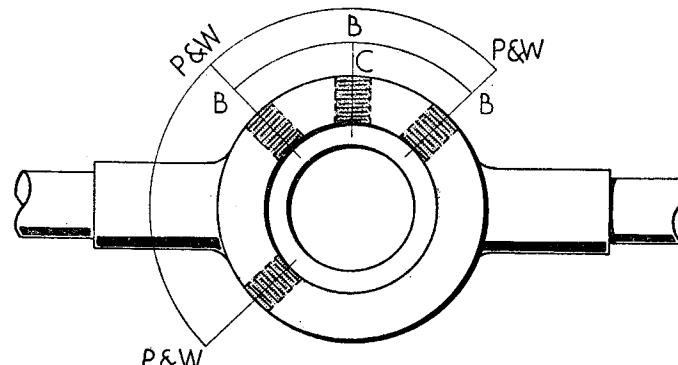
Fixing-screw positions: "P & W"—for Pratt & Whitney and Warrior dies; "B"—for most British dies; "C"—for Card dies
